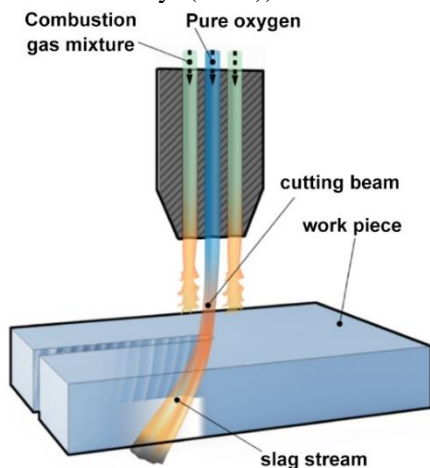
Show flame-cutting system (<https://www.manufacturingguide.com/en/flame-cutting-2d>)
